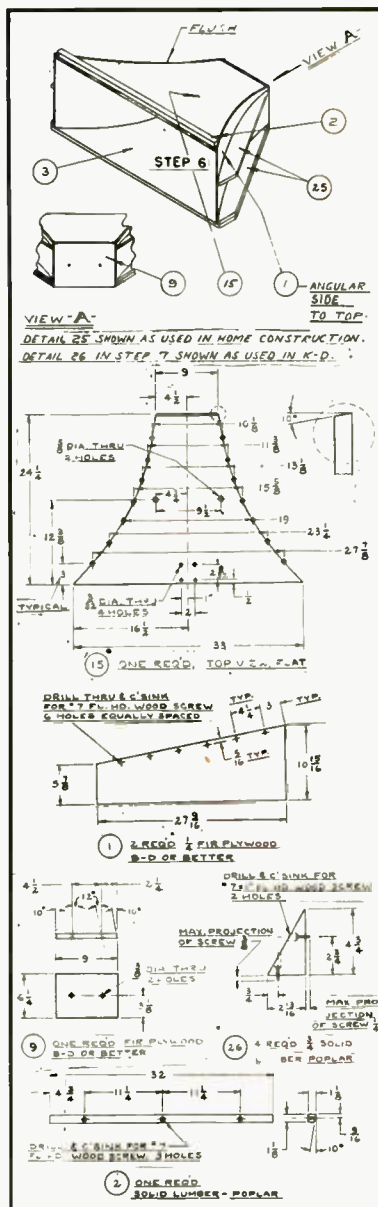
Wood parts and assembly for the diffraction horn assembly which tops the low-frequency section.
